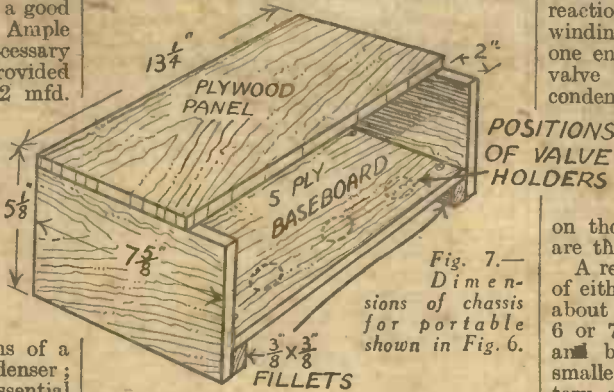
Dimensions of chassis for portable shown in Fig. 6.
